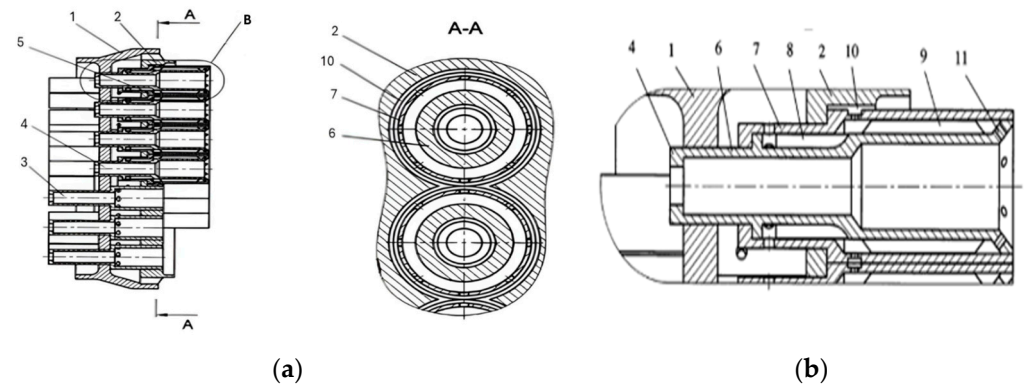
(a) Cross-sectional view of the fuel injection module and front view of injection units (A-A); (b) Cross sectional view of a injection units. (1)-Housing of the gas generator; (2)-Fire bottom; (3)-Gas liquid nozzles; (4)-Gas liquid nozzles; (5)-Radial partitions; (6)-Inner sleeve; (7)-Outer sleeve; (8)-Longitudinal grooves; (9)-Longitudinal grooves; (10)-Annular gap; (11)-Inclined holes. Reproduced from RU Patent No. 2806937C1 in Ref. [194].
